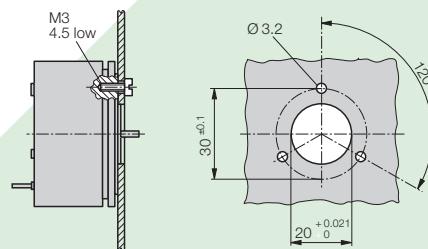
Drilling plan for fixing with 3 cheesehead screws M3.
